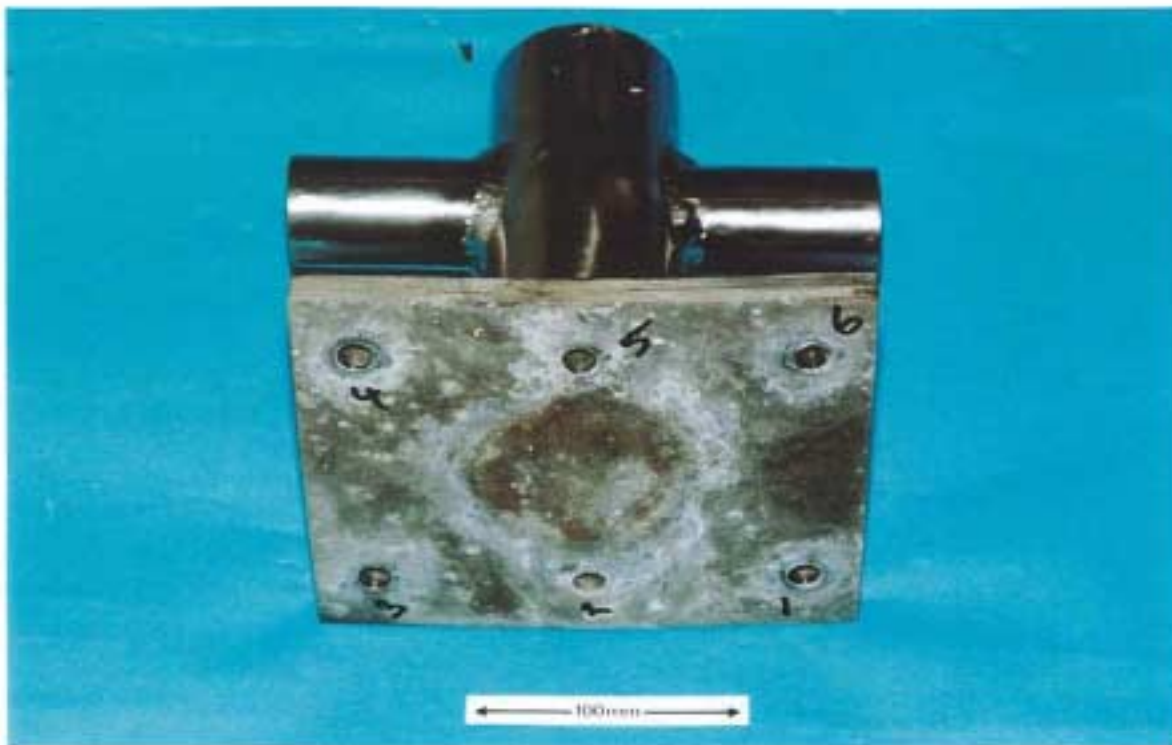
Underside view of bollard, showing welding related distortion of the base plate.
